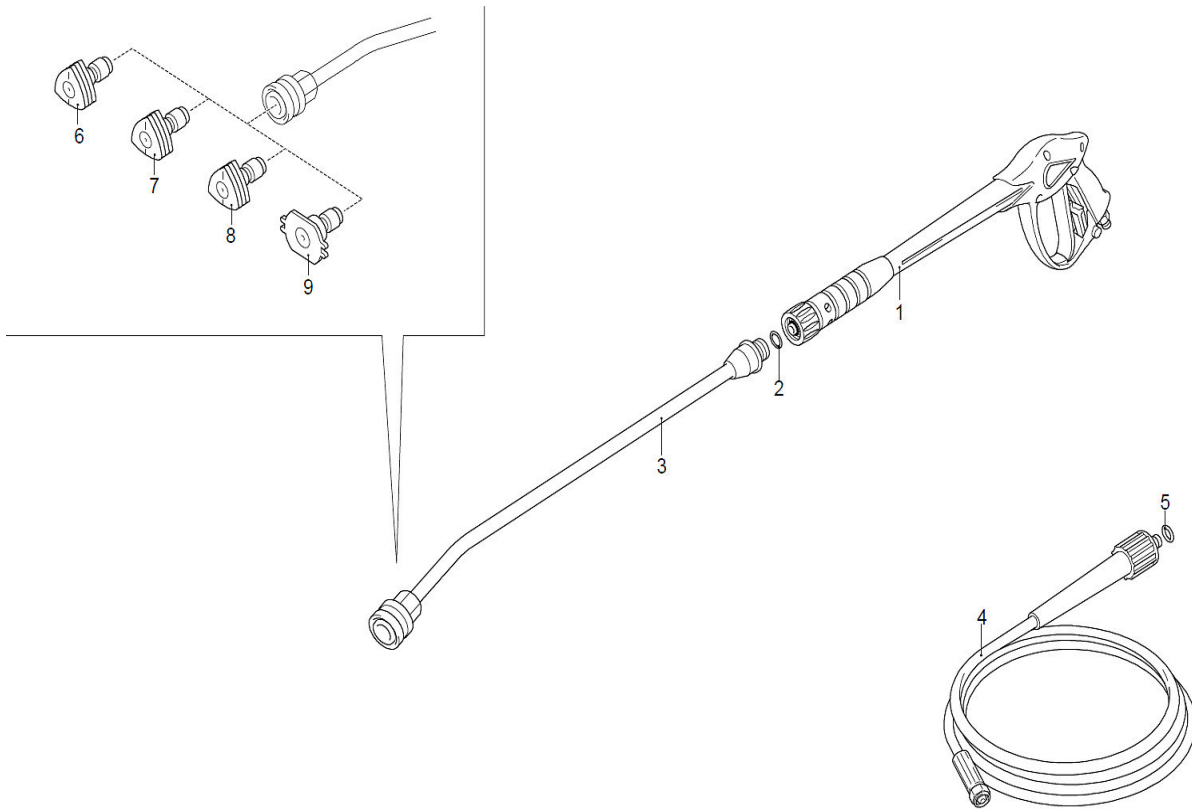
Spare parts drawing 9 - Nozzle for HDR-K 66-20 BL, HDR-K 72-22 BH and HDR-K 96-28 BL
